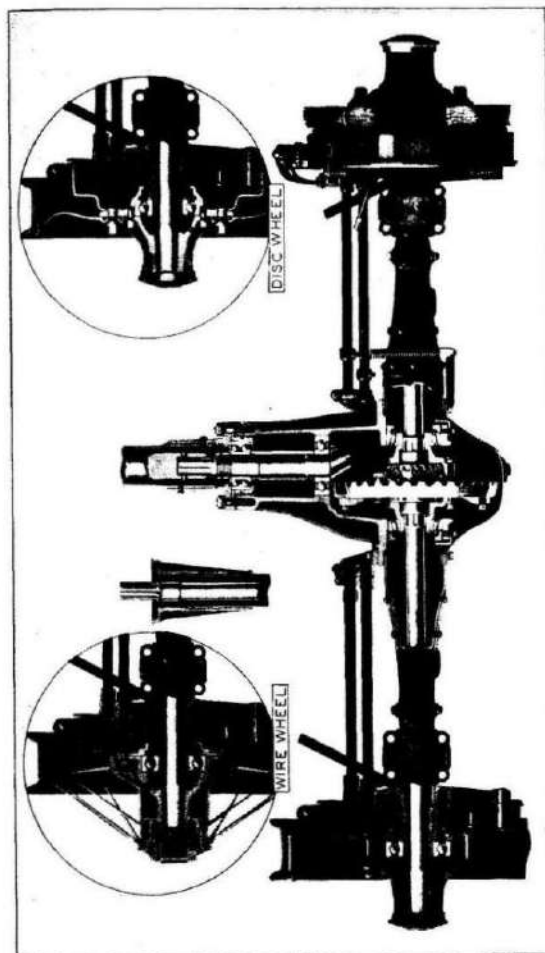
Sectional view of rear axle with wood wheel, wire wheel and disc wheel.
